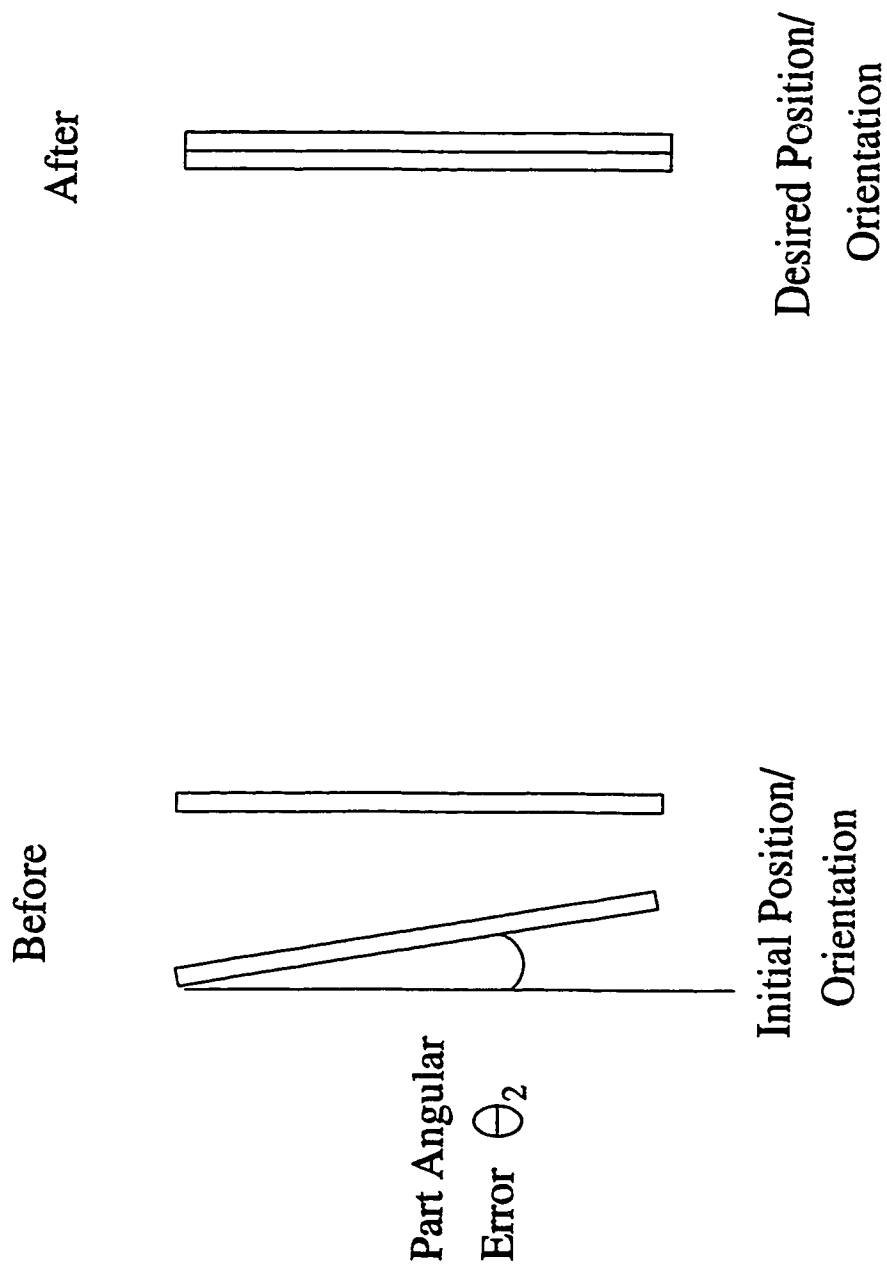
Top View of Two 2-D Sheet Metal Parts Before and After Assembly
